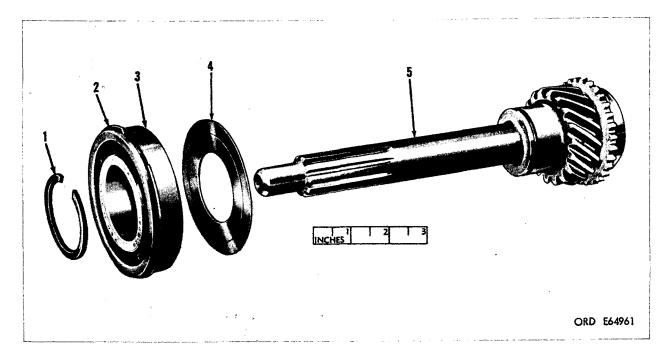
Transmission main drive gear, assembly—partial exploded view.
